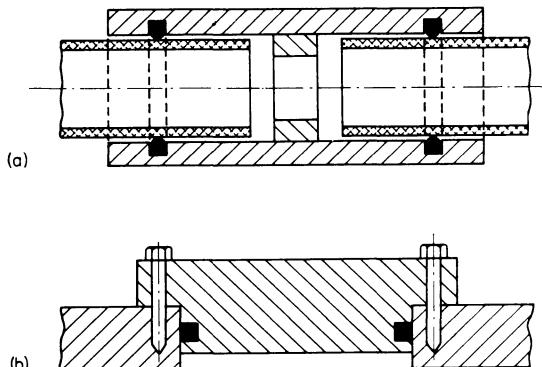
O-ring seal in rectangular groove: (a) joint for glass tubes (after Yonts¹³⁴⁴); (b) cover seal. After Kurie⁷²³ (*Courtesy of The American Institute of Physics*)
